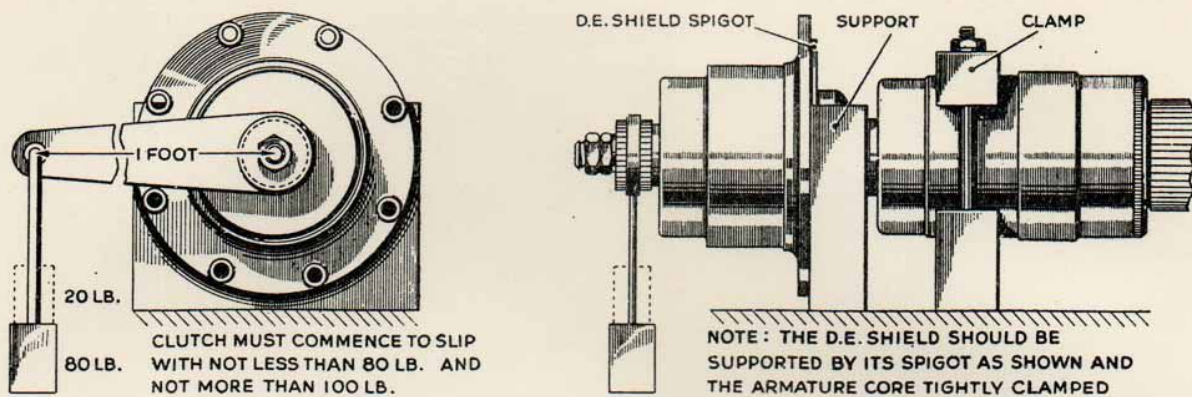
TESTING CLUTCH SLIP TORQUE.
